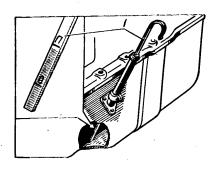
Checking Oil Level in Engine Crankcase: 1 - oil dipstick
